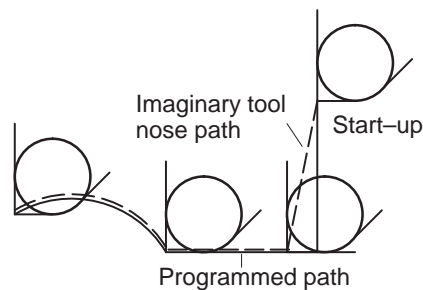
(d) Tool path when programming using the imaginary tool nose
